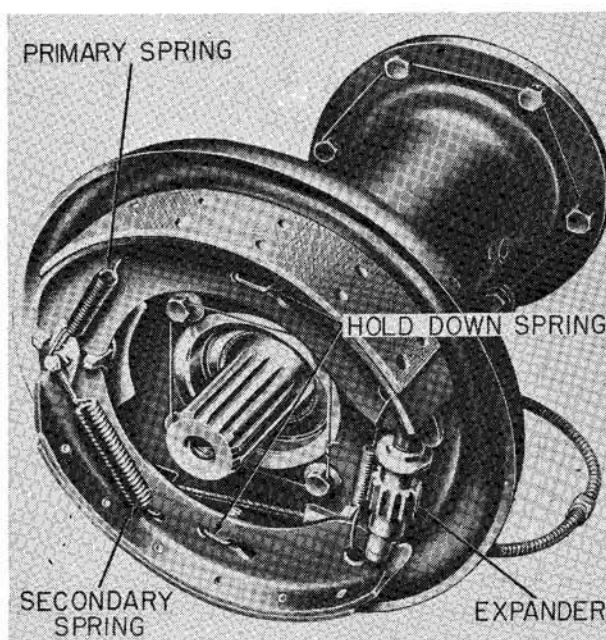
View of model "FMD" and "FPM" brake assembly with brake drum cover and drum removed. Refer also to Fig. 163.
